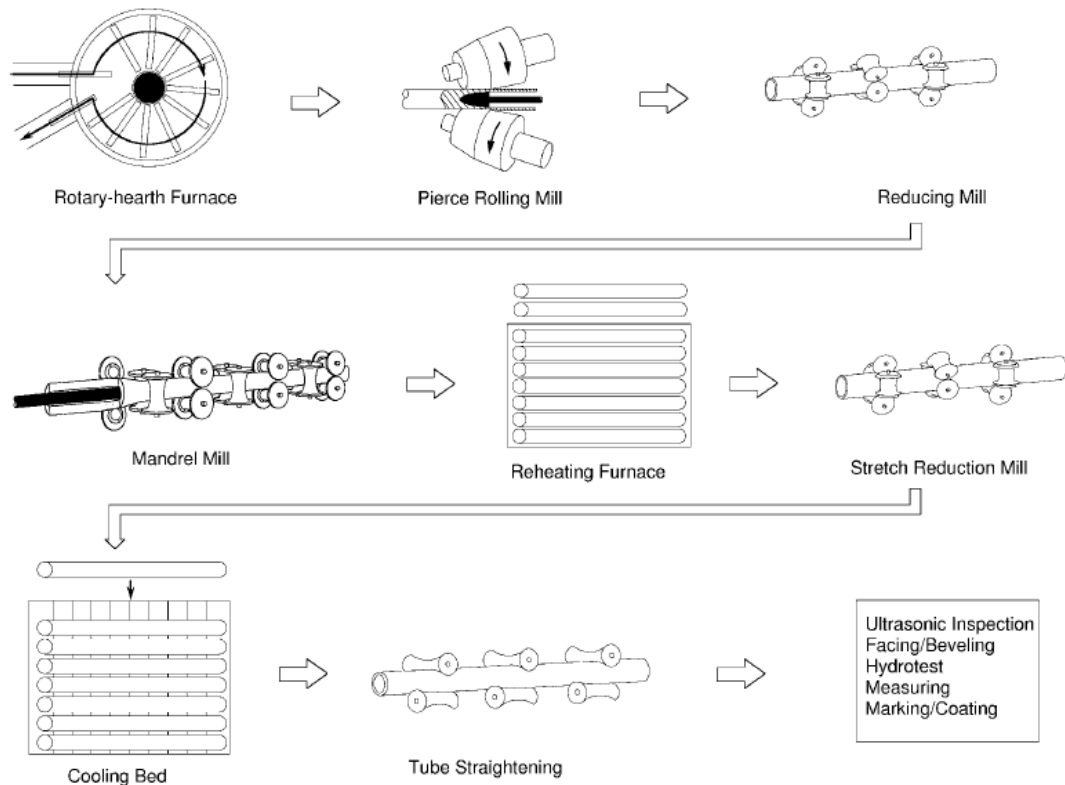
Steps involved in seamless tube manufacturing method by Continuous Mandrel Rolling Process.
